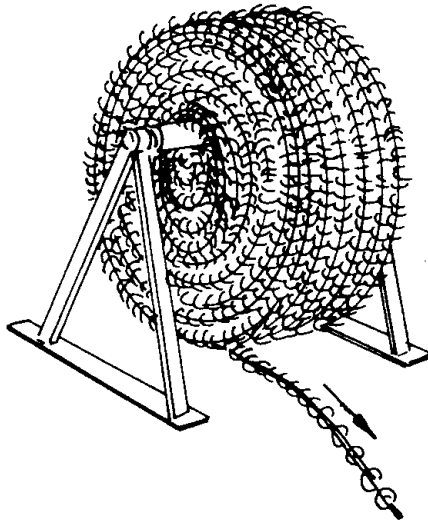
Un-winding the conveyor chain / conveyor cable
